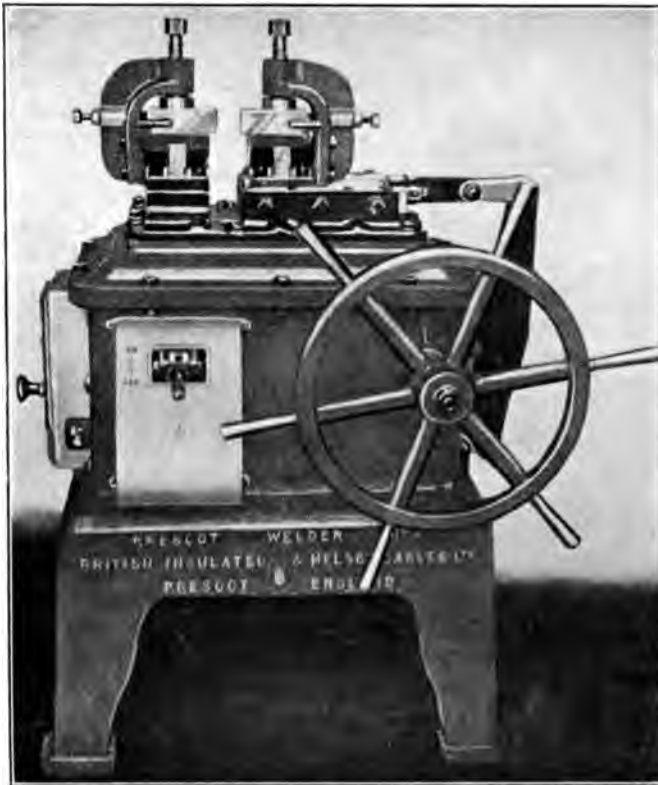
BUTT WELDER FOR TOOL STEEL AND OTHER WORK.
